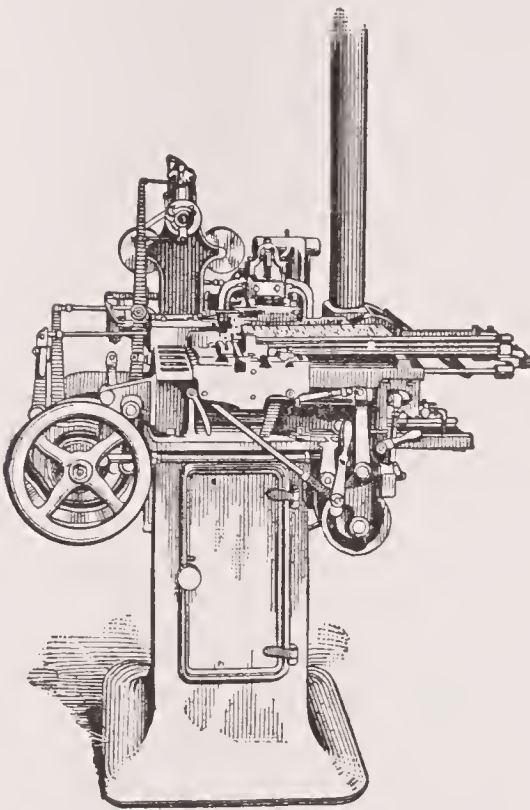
LANSTON MONOTYPE CASTING MACHINE.
